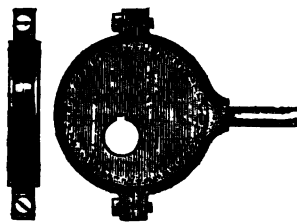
ECCENTRIC AND CONNECTING-ROD.
